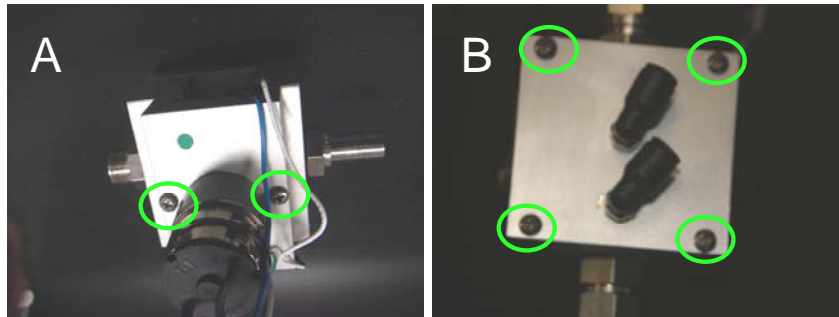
Photographs of the two screws that hold the motor mount plate to the upper and lower housing plates (Panel A) and the four screws holding the front face plate (Panel B).
